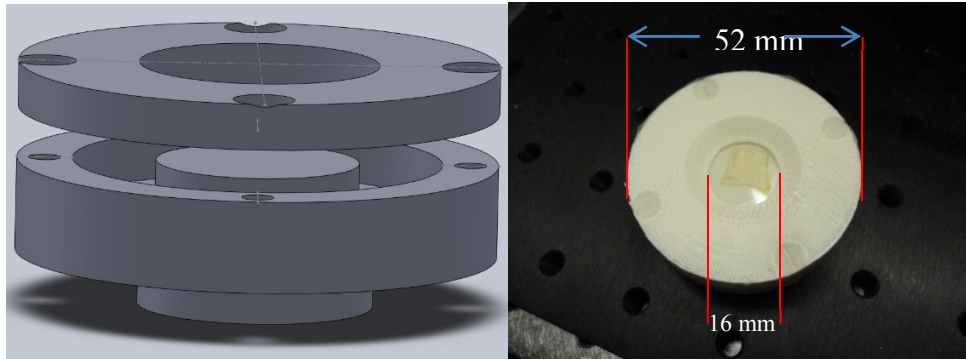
Sample holder design sketch (SolidWorks, left) and the 3D printed product showing its dimensions (right).
